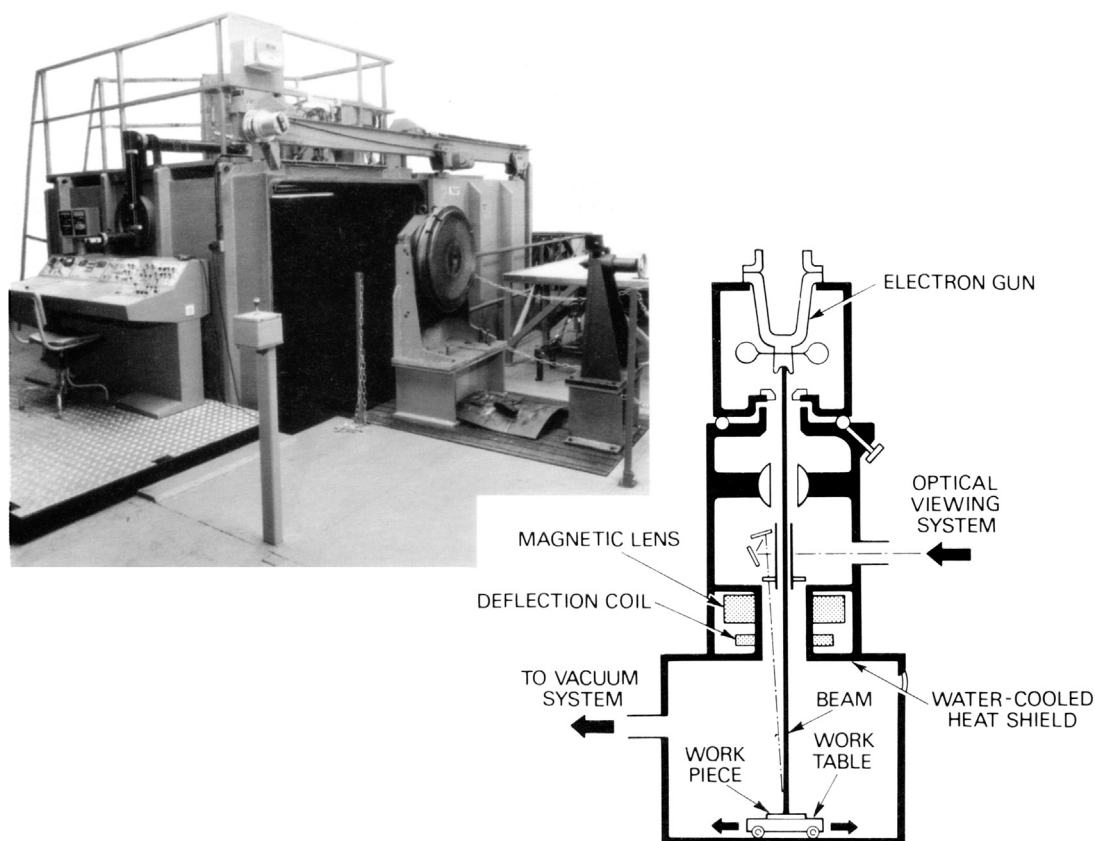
Electron beam welding. (Source: Rolls Royce.)
